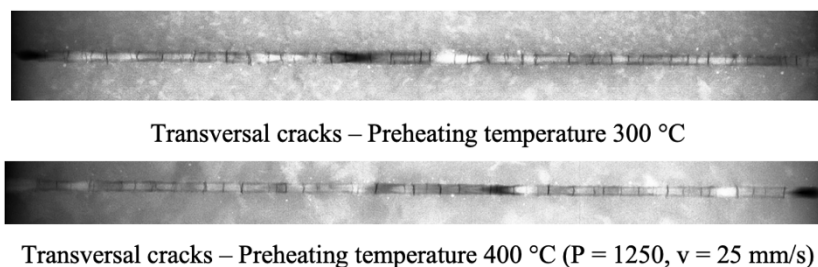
Transversal cracks in the weld beads after laser BoP tests
